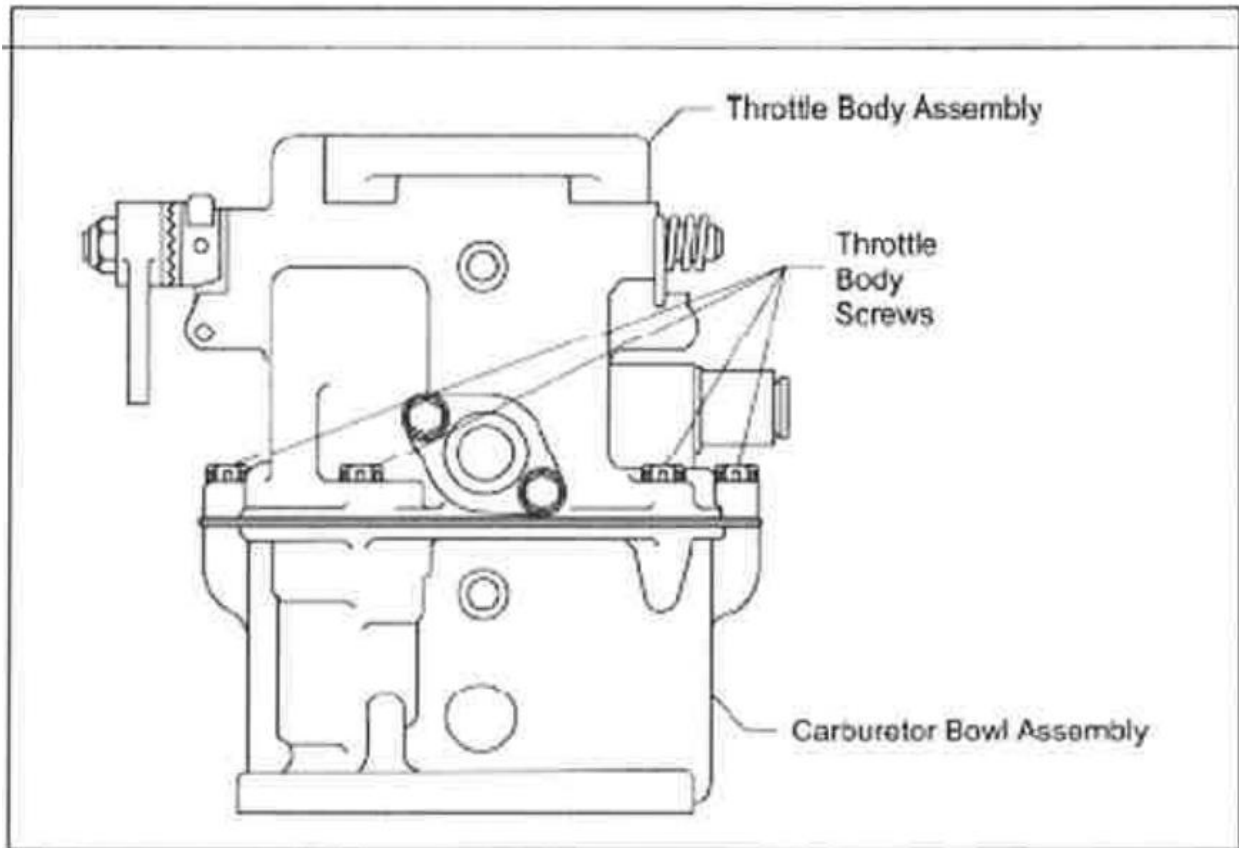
MA-4SPA Carburetor Throttle Body Screws Schematic
